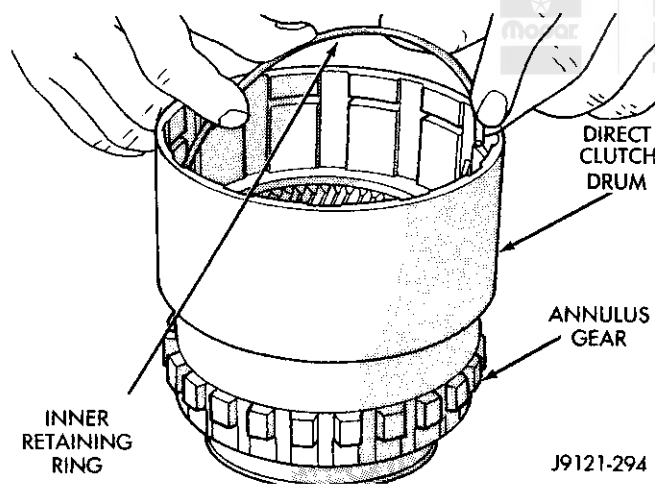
Installing Clutch Drum Inner Retaining Ring
